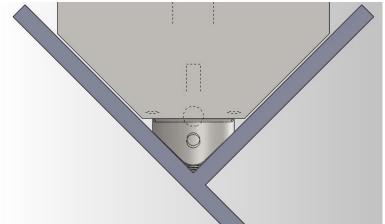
The picture the gap between the Shoulder Holder and weld piece
